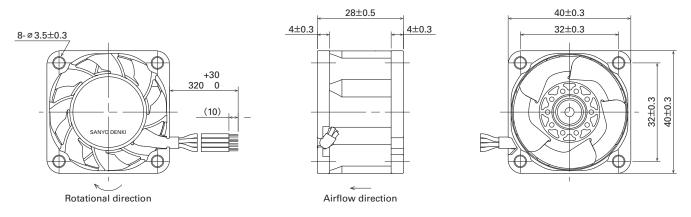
Dimensions of the San Ace 40L 9LG type (Unit: mm)
